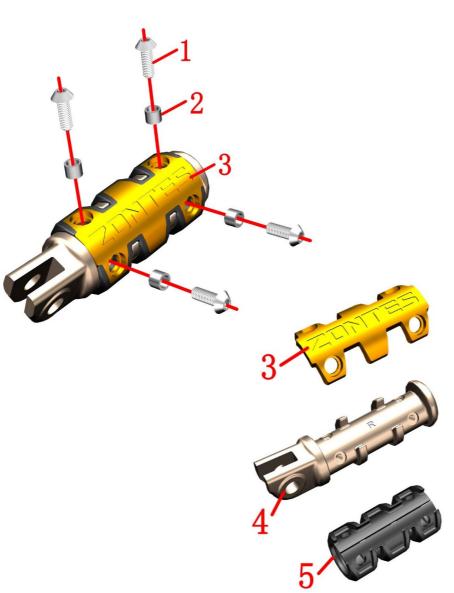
FOOT PEDAL		Front right pedal after sale parts	CHK	(0)
